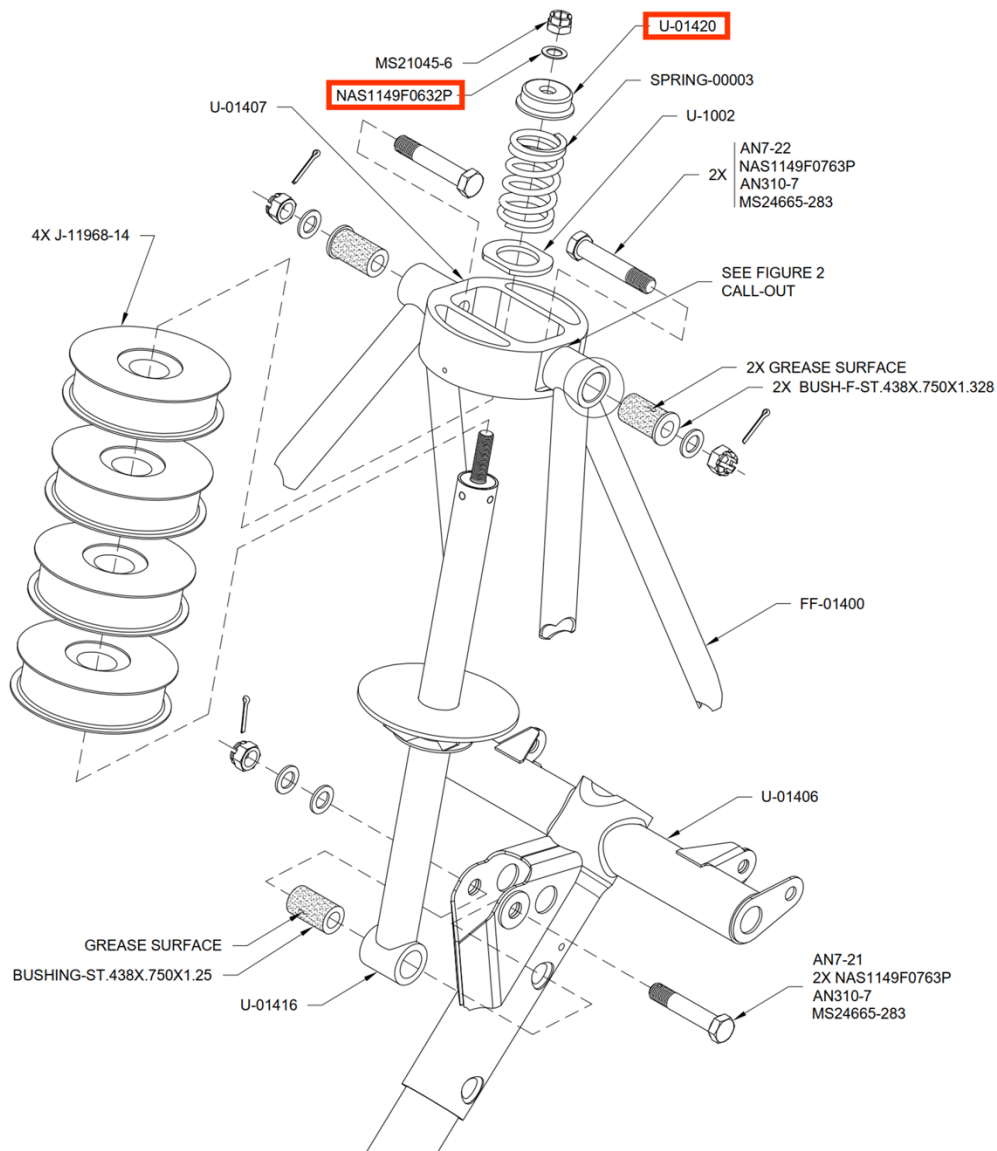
EXCERPT FROM RV-14 KIT ASSEMBLY INSTRUCTIONS PAGE 40A-06
